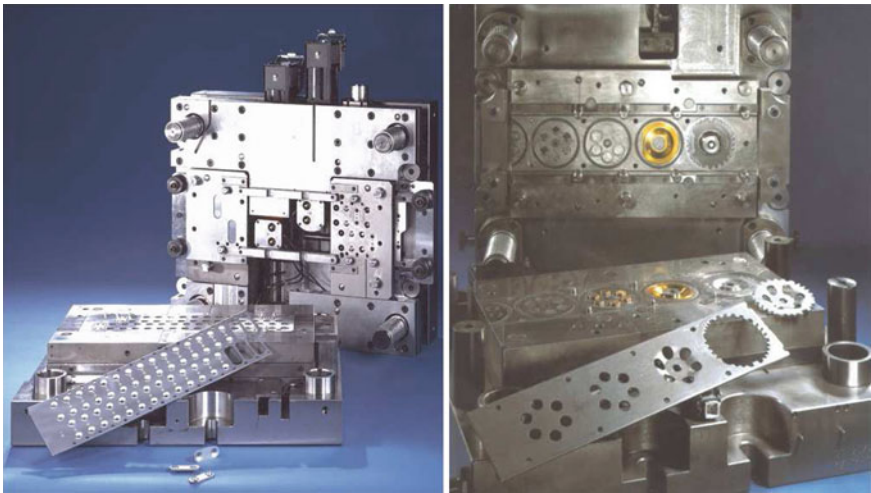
Fine blanking with a progressive compound tool; *left*—progressive compound tool with integrated thread-forming unit; *right*—manufacture of a gear in four steps (Source Feintool AG)
